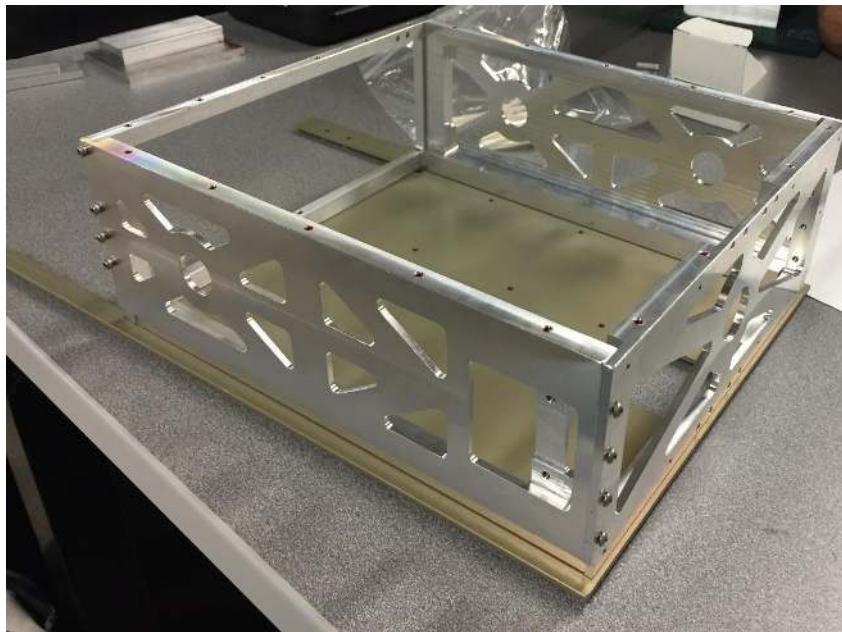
6U CubeSat Structure with the Bottom Plate, Side Plate, Front Plate and Payload Interface Plate assembled.
